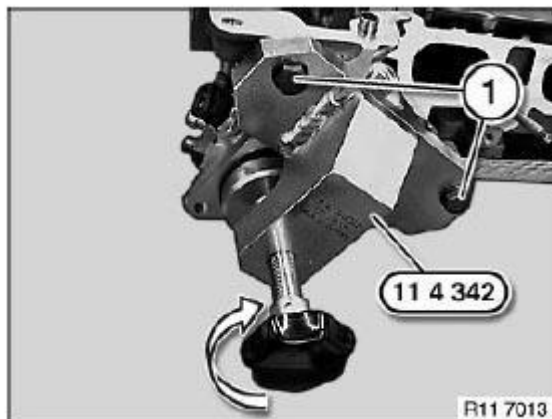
Fitting Special Tool 11 4 342 With Bolts
